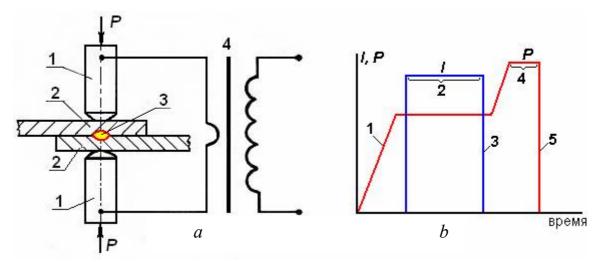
Scheme of resistance spot welding (a); cyclogram of welding process (b)
